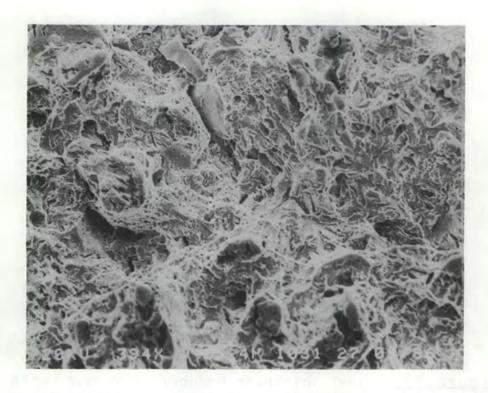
Fractograph of E11018 weld remote from initiation point showing fully dimpled rupture (394X)
